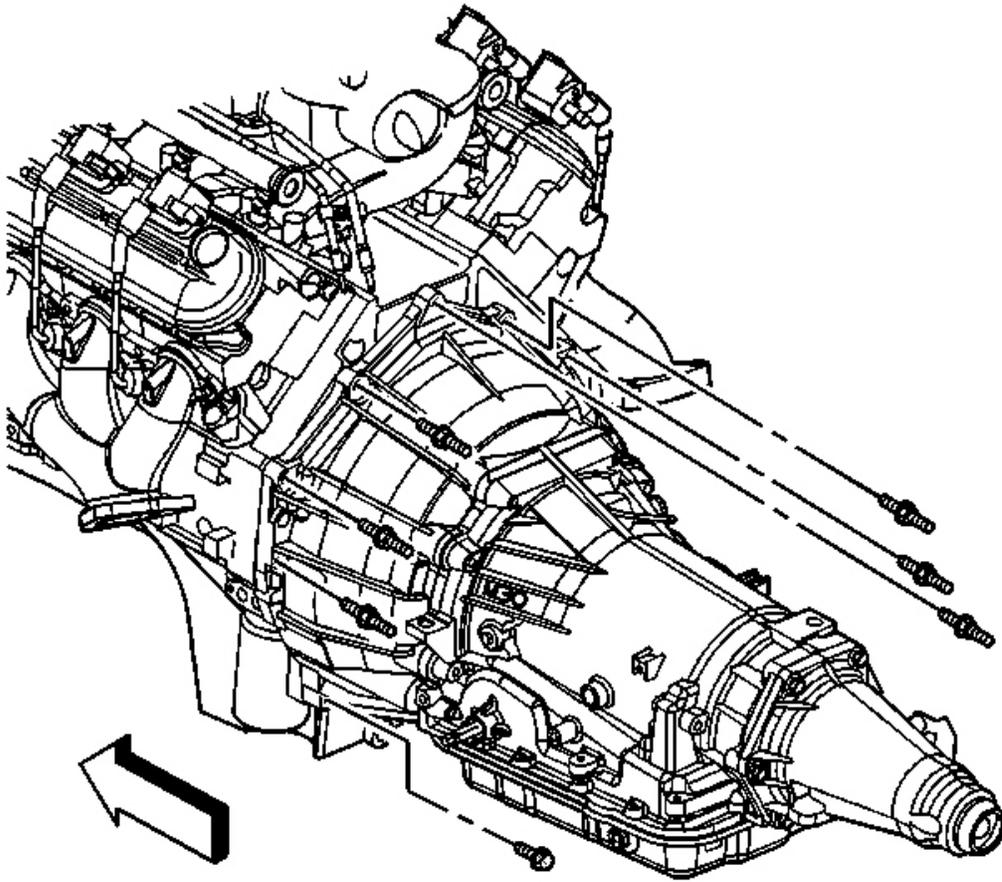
Identifying The Six Studs & One Bolt Securing Transmission To Engine
